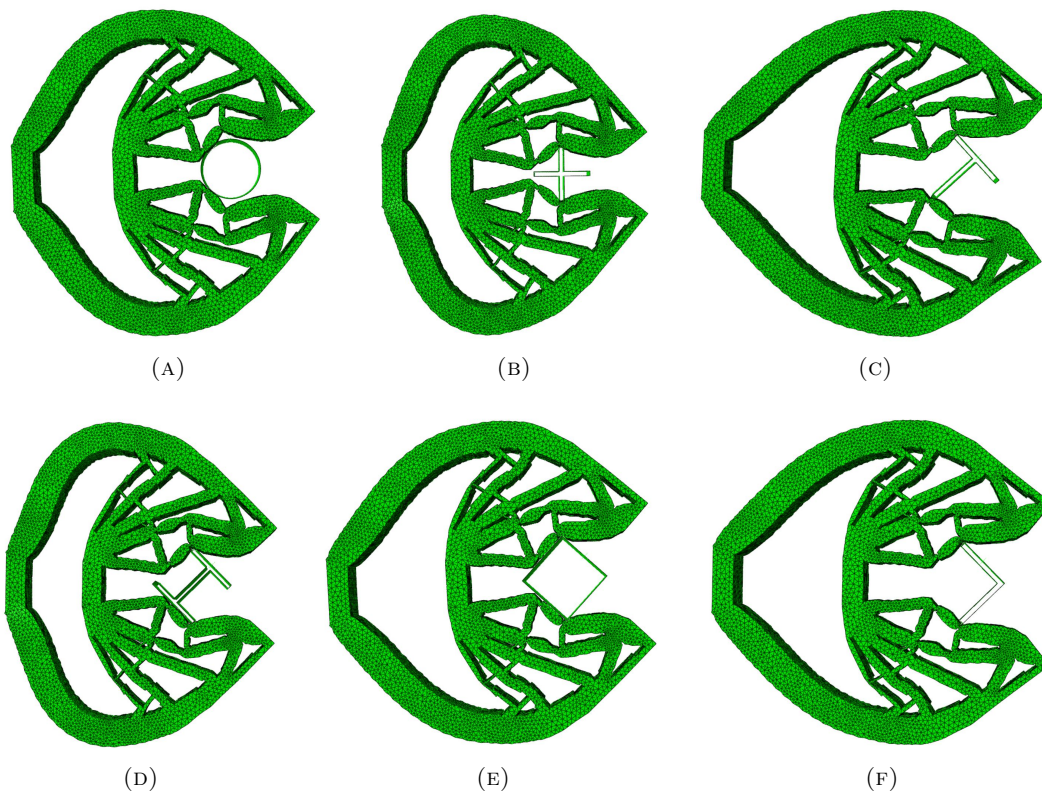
Gripper #1 grasping each of the beam members in target beam member set #1: (A) Pipe Beam, (B) “+” Beam, (C) “T” Beam, (D) “T” Beam, (E) Box Beam, (F) “L” Beam.
